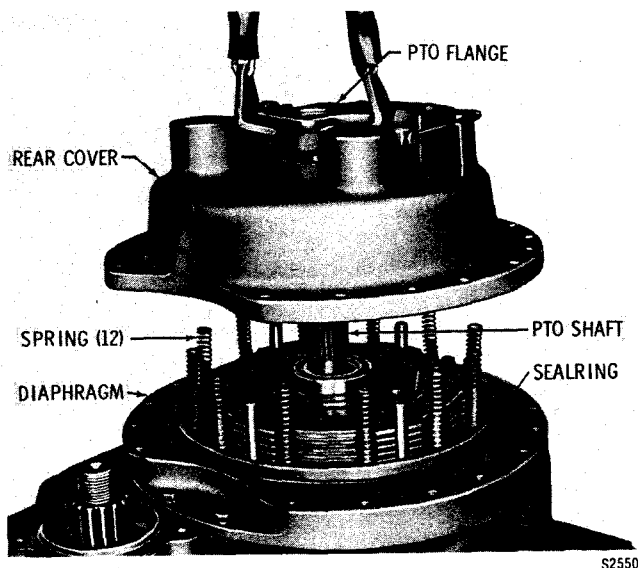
Removing rear cover assembly (TTB 2221-1, 2421-1 with converter-driven PTO)
